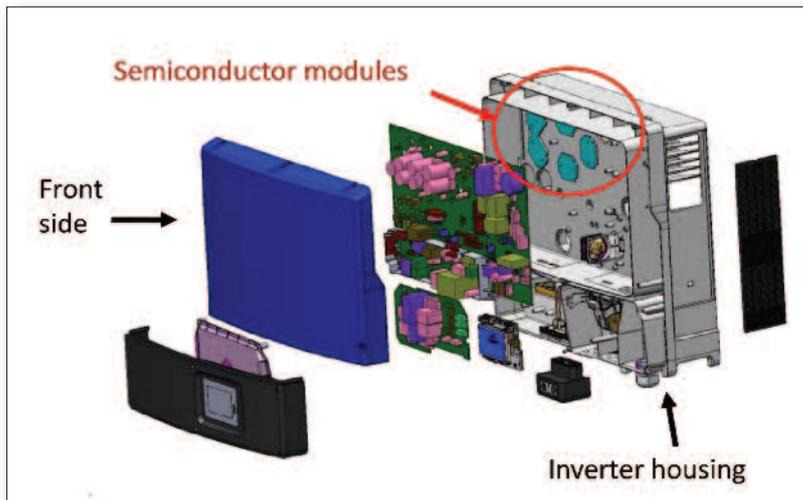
Exploded view to a three phase PV inverter - Sunny TRIPOWER [6]
